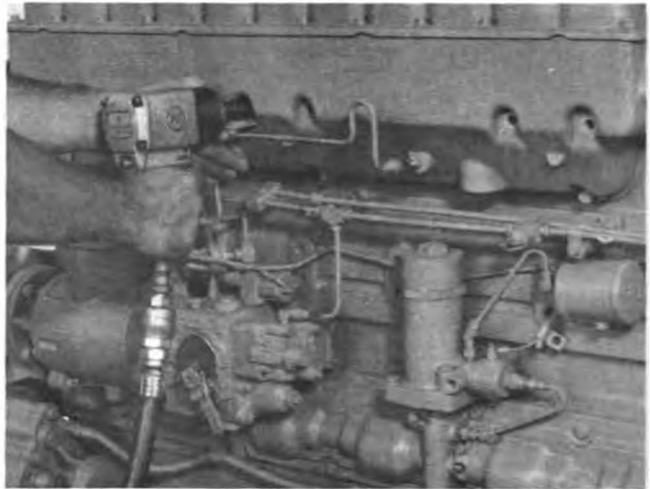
Remove The Capscrews From The Aftercooler.
